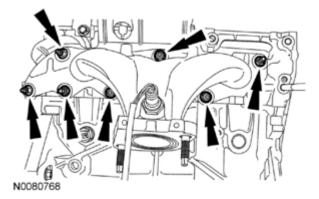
Locating Exhaust Manifold Nuts Courtesy of FORD MOTOR CO.
